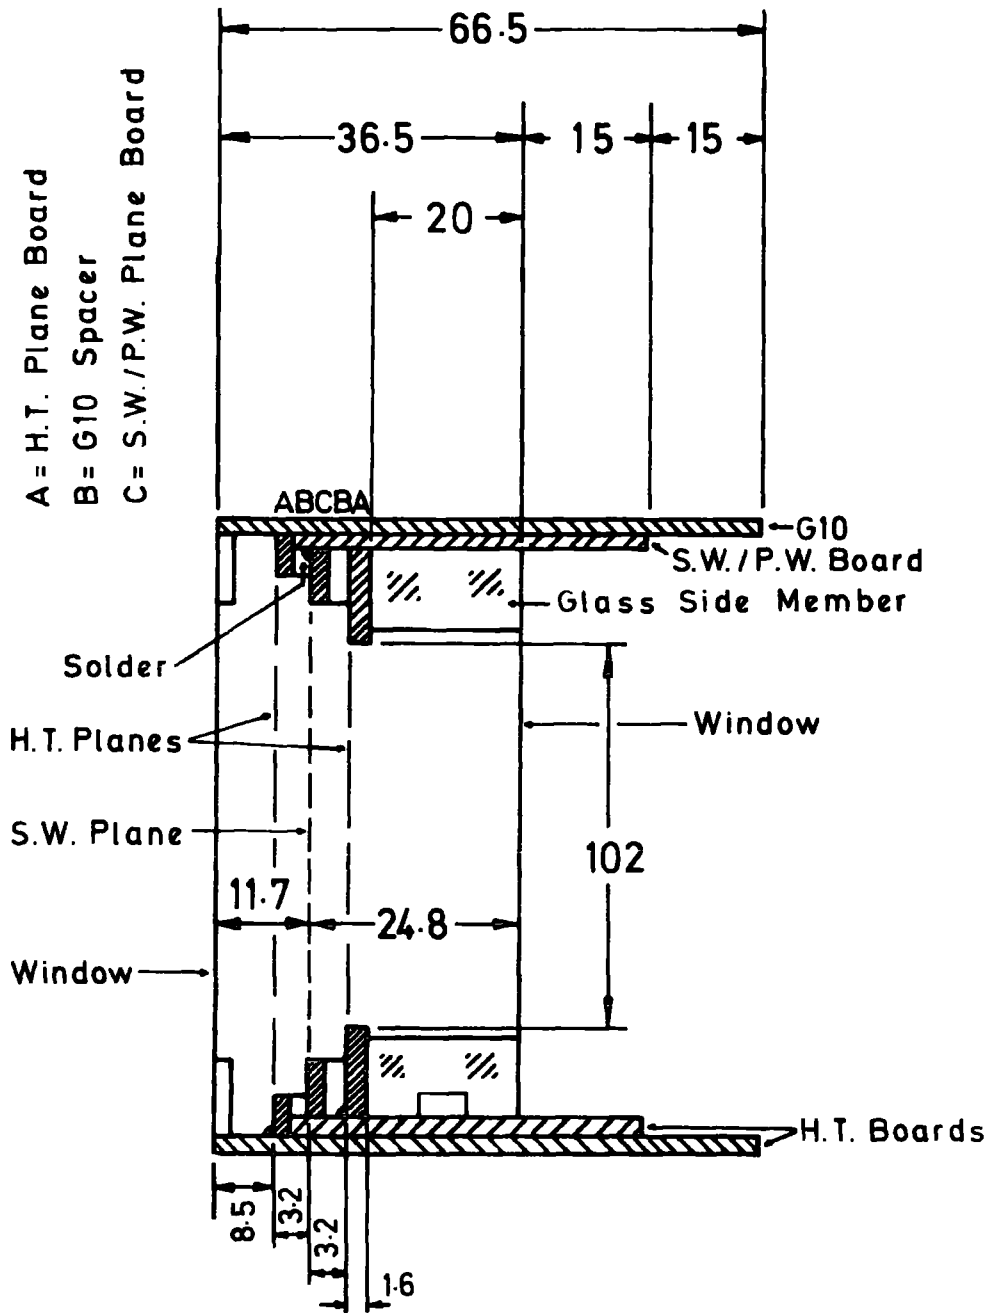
ASSEMBLY OF WIRE PLANES
